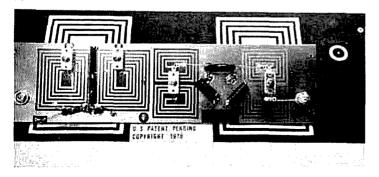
Half-size layout for the 144-MHz bandpass-filter preamplifier board.
